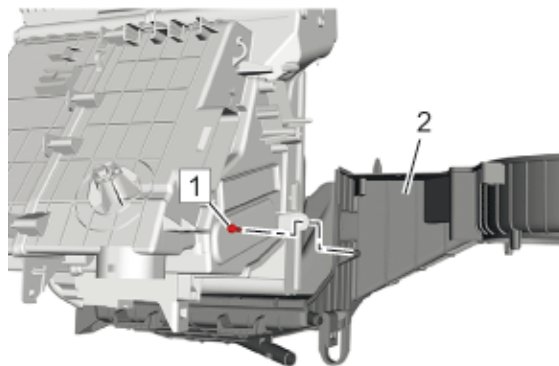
Air Conditioning Evaporator Lower Case And Bolt
